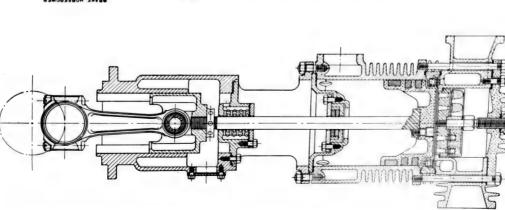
Cross-section compressor cylinder Clark Dri-
